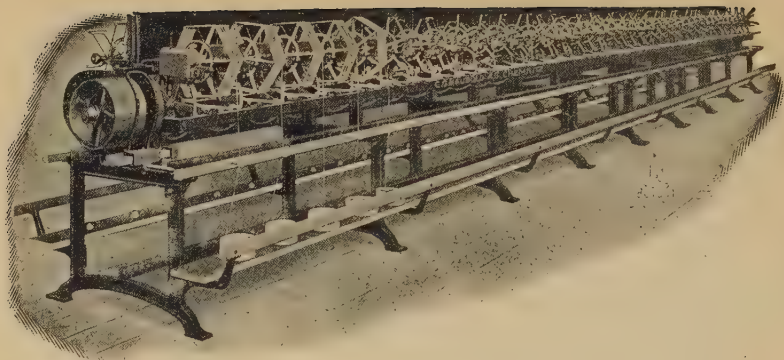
Reeling Machine (from Cake). (Courtesy C. G. Haubold A. G., Chemnitz.)
